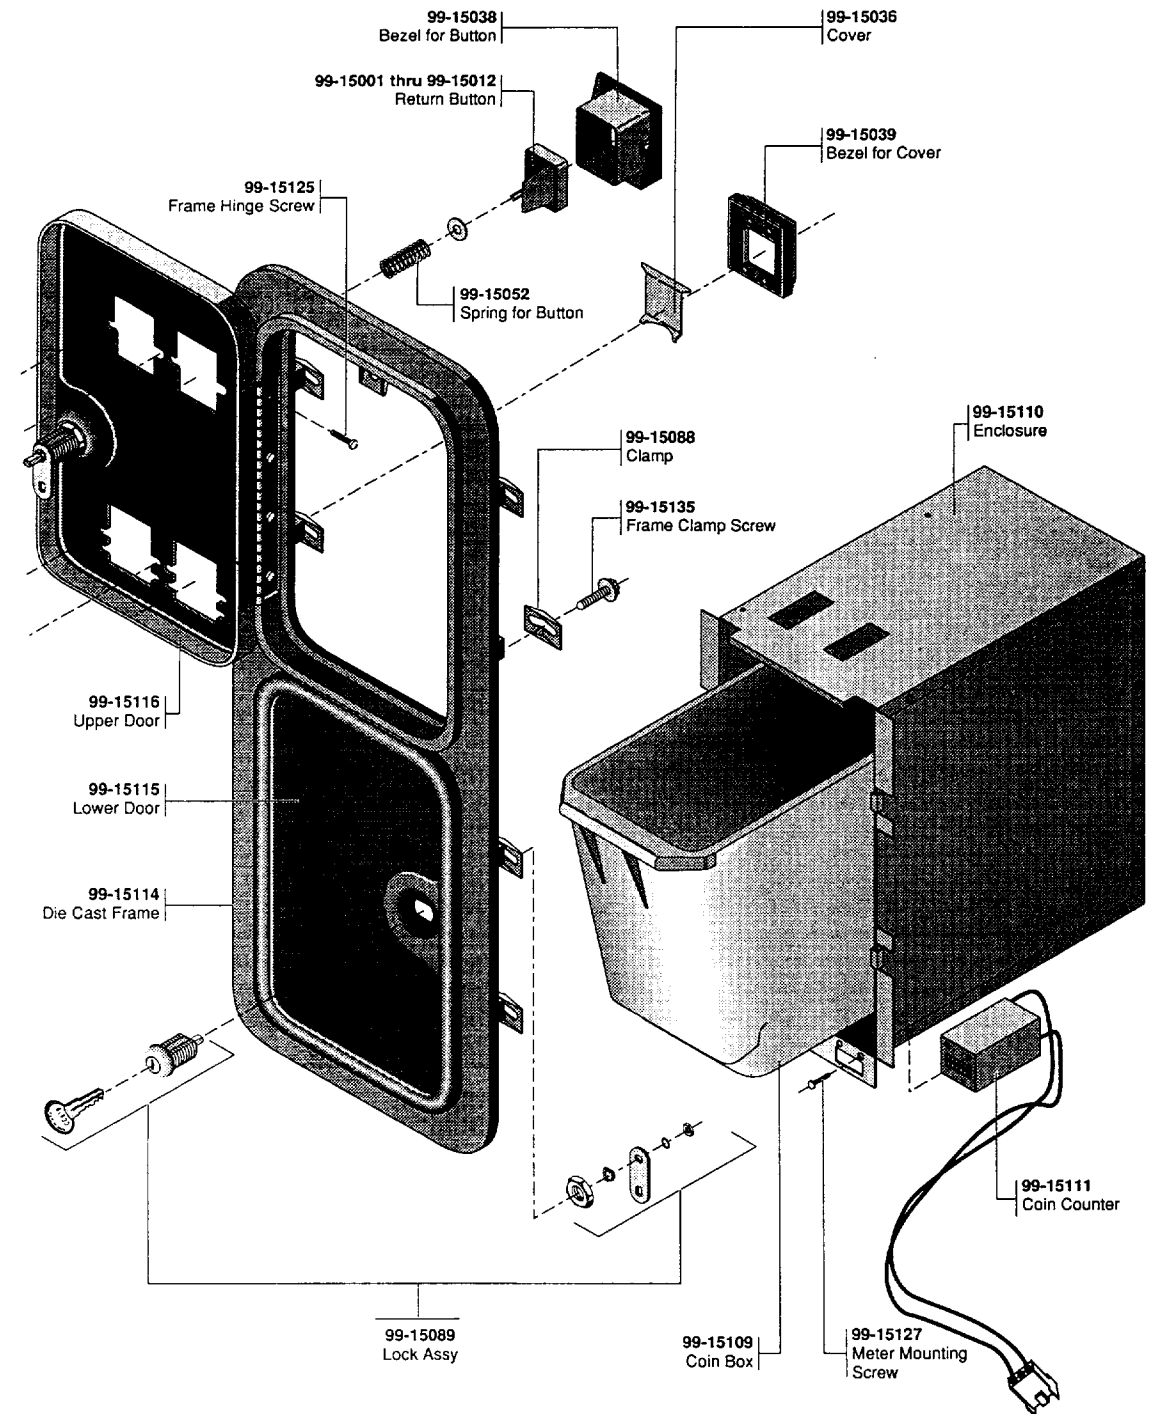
Coin Controls, Inc. Coin Door Assembly
